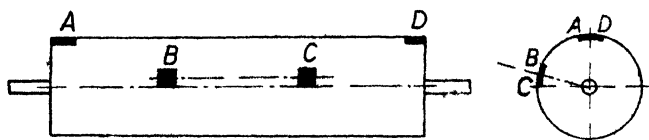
BALANCING FOUR-THROW CRANKSHAFTS
